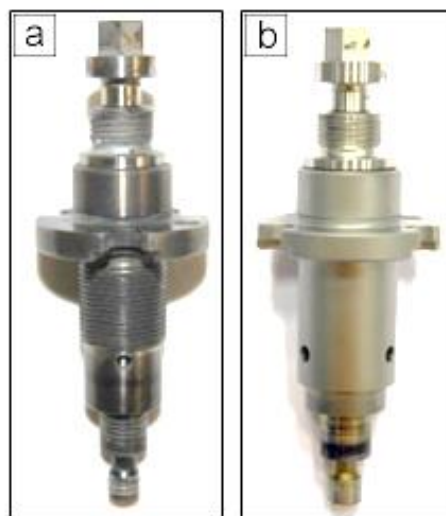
FSpW tools used to optimize the process: (a) threaded and (b) non-threaded geometries.
